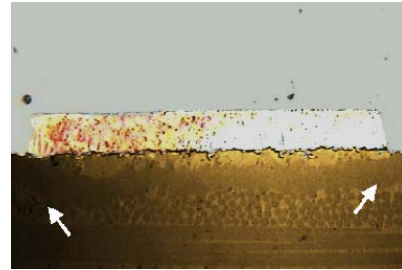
Crack in board resin underneath pad (thick dark area), no edge bond
